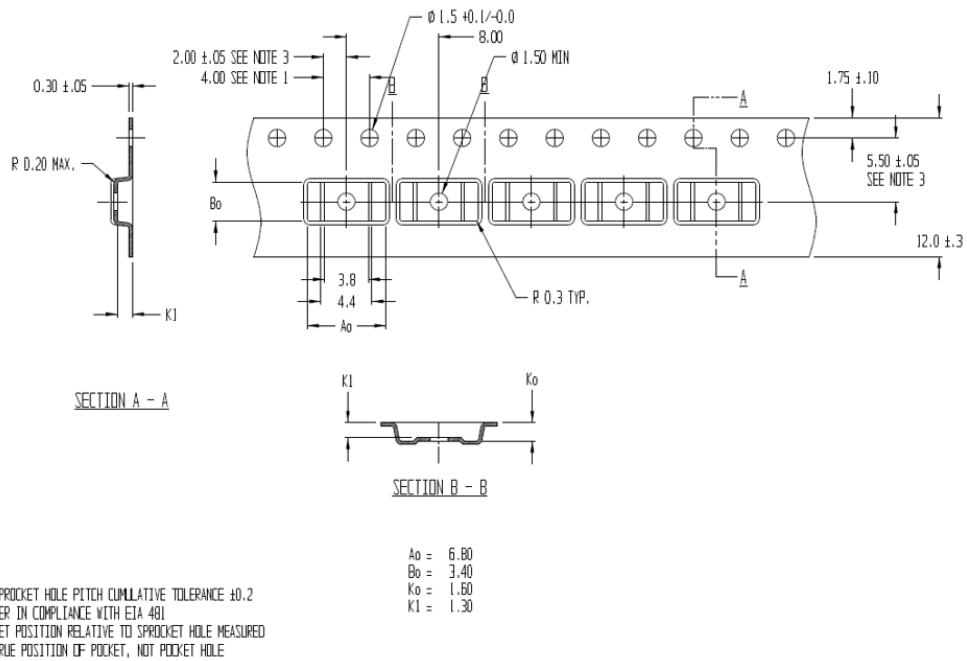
Tape and Pocket Drawing for TSSOP-8 Package
